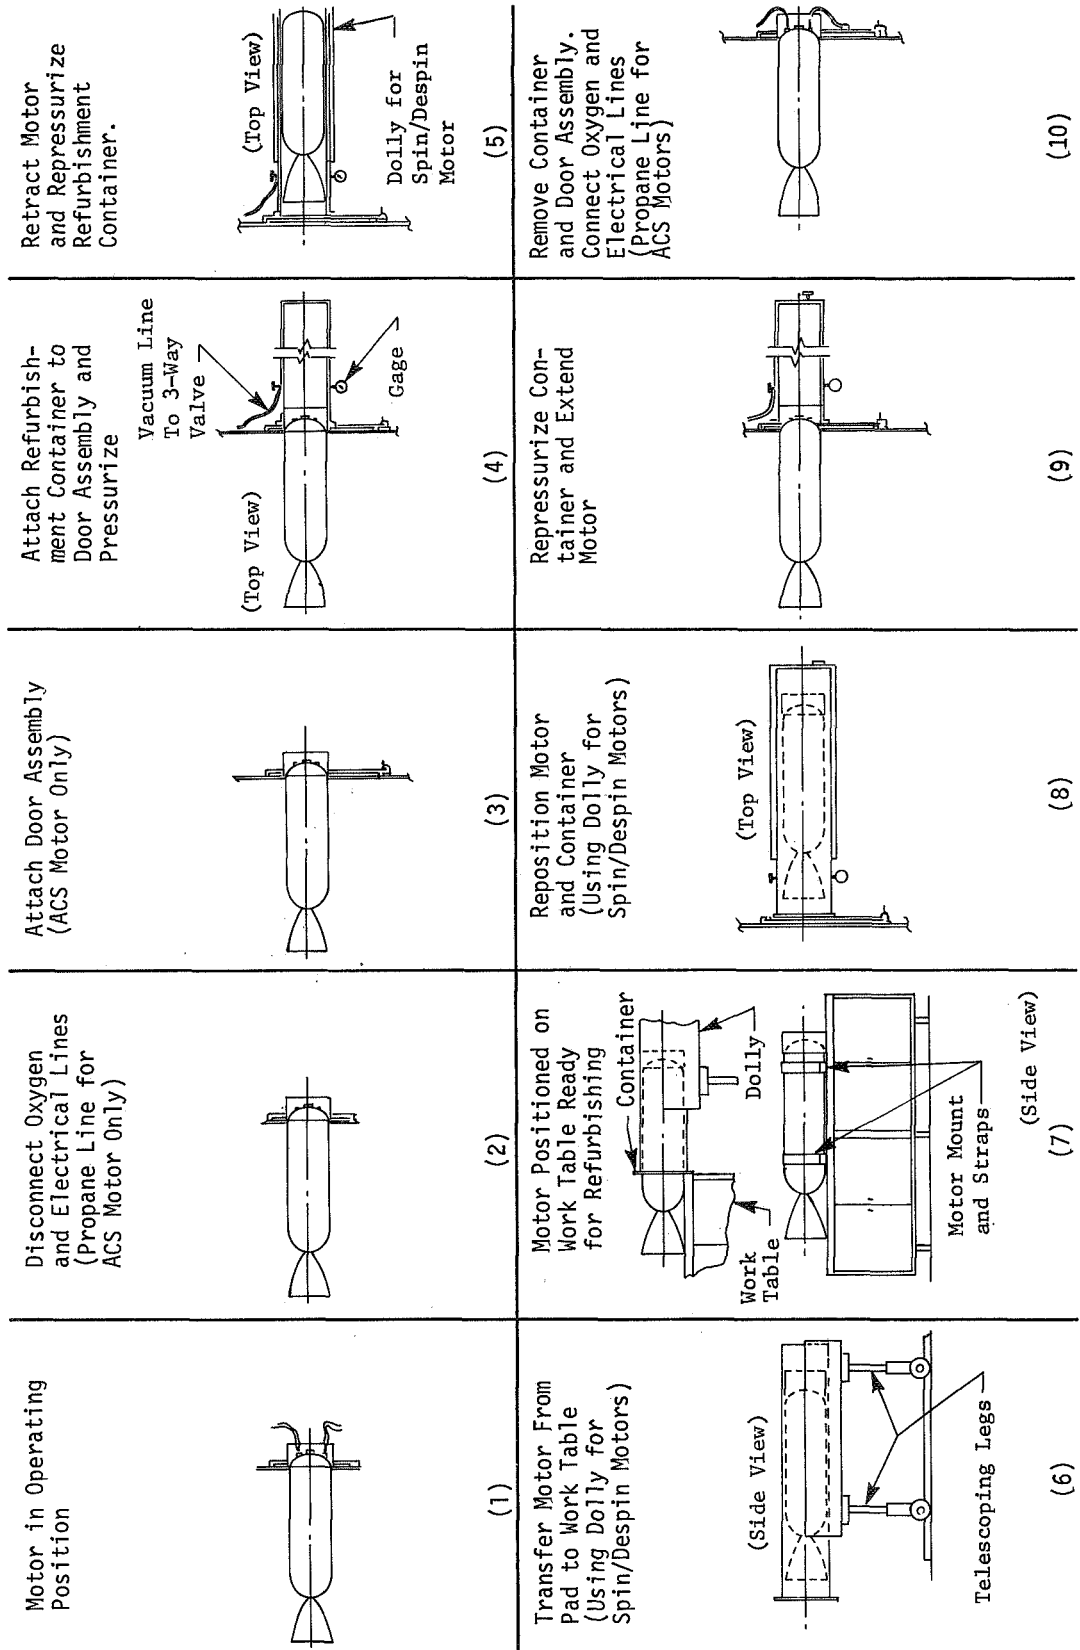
Refurbishment of Thrust Chamber Assemblies
